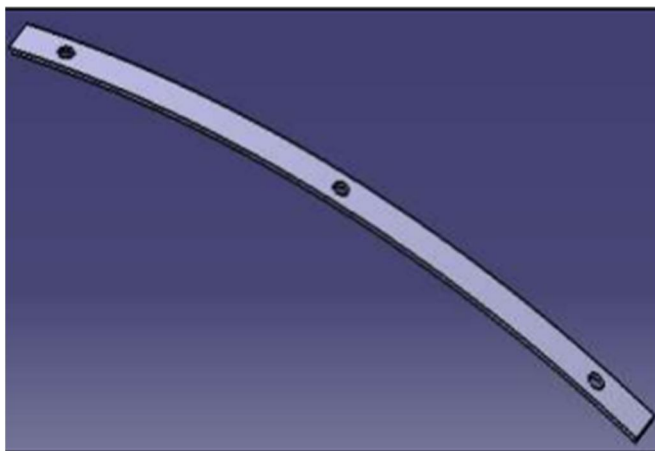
CAD Model of Mono Leaf Spring of Alto800 Car
